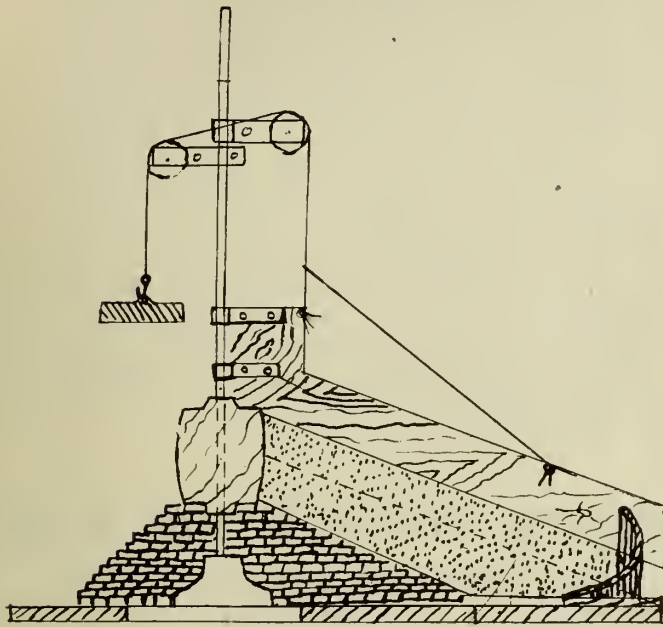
SEGMENT, STRICKLE, AND PULLEY ARRANGEMENT FOR SWEEPING UP DRIVING SURFACE OF BLADES.
